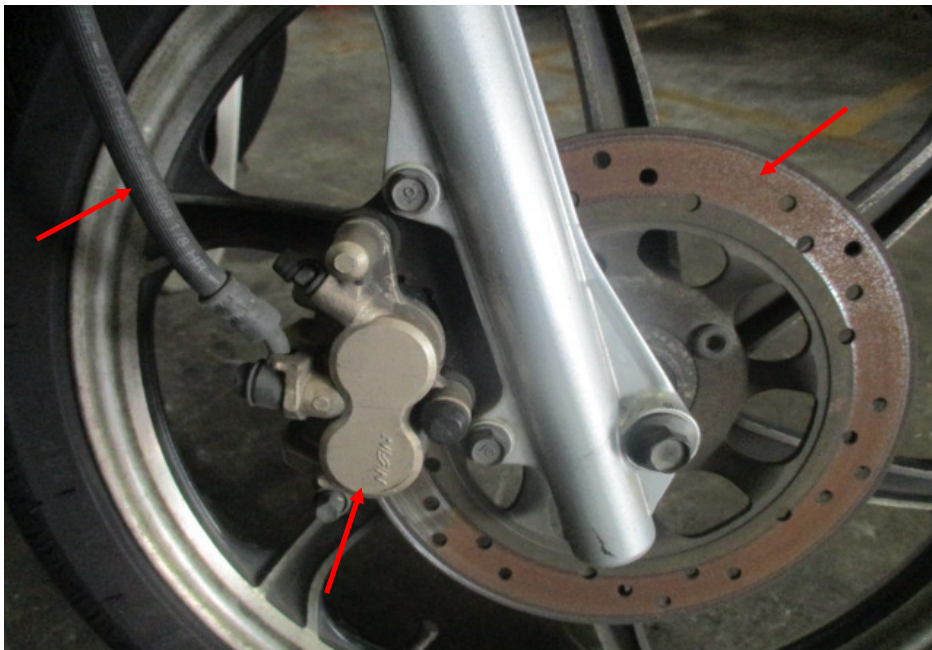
shows a close up view of the front brake caliper, front brake disc and front brake hose (arrowed) of the Motorcycle, which are all part of the components in the hydraulic front brake system of the Motorcycle. Our visual checks of these various components had revealed all to be intact with no visible damage. No leakage of brake fluid was also observed.
